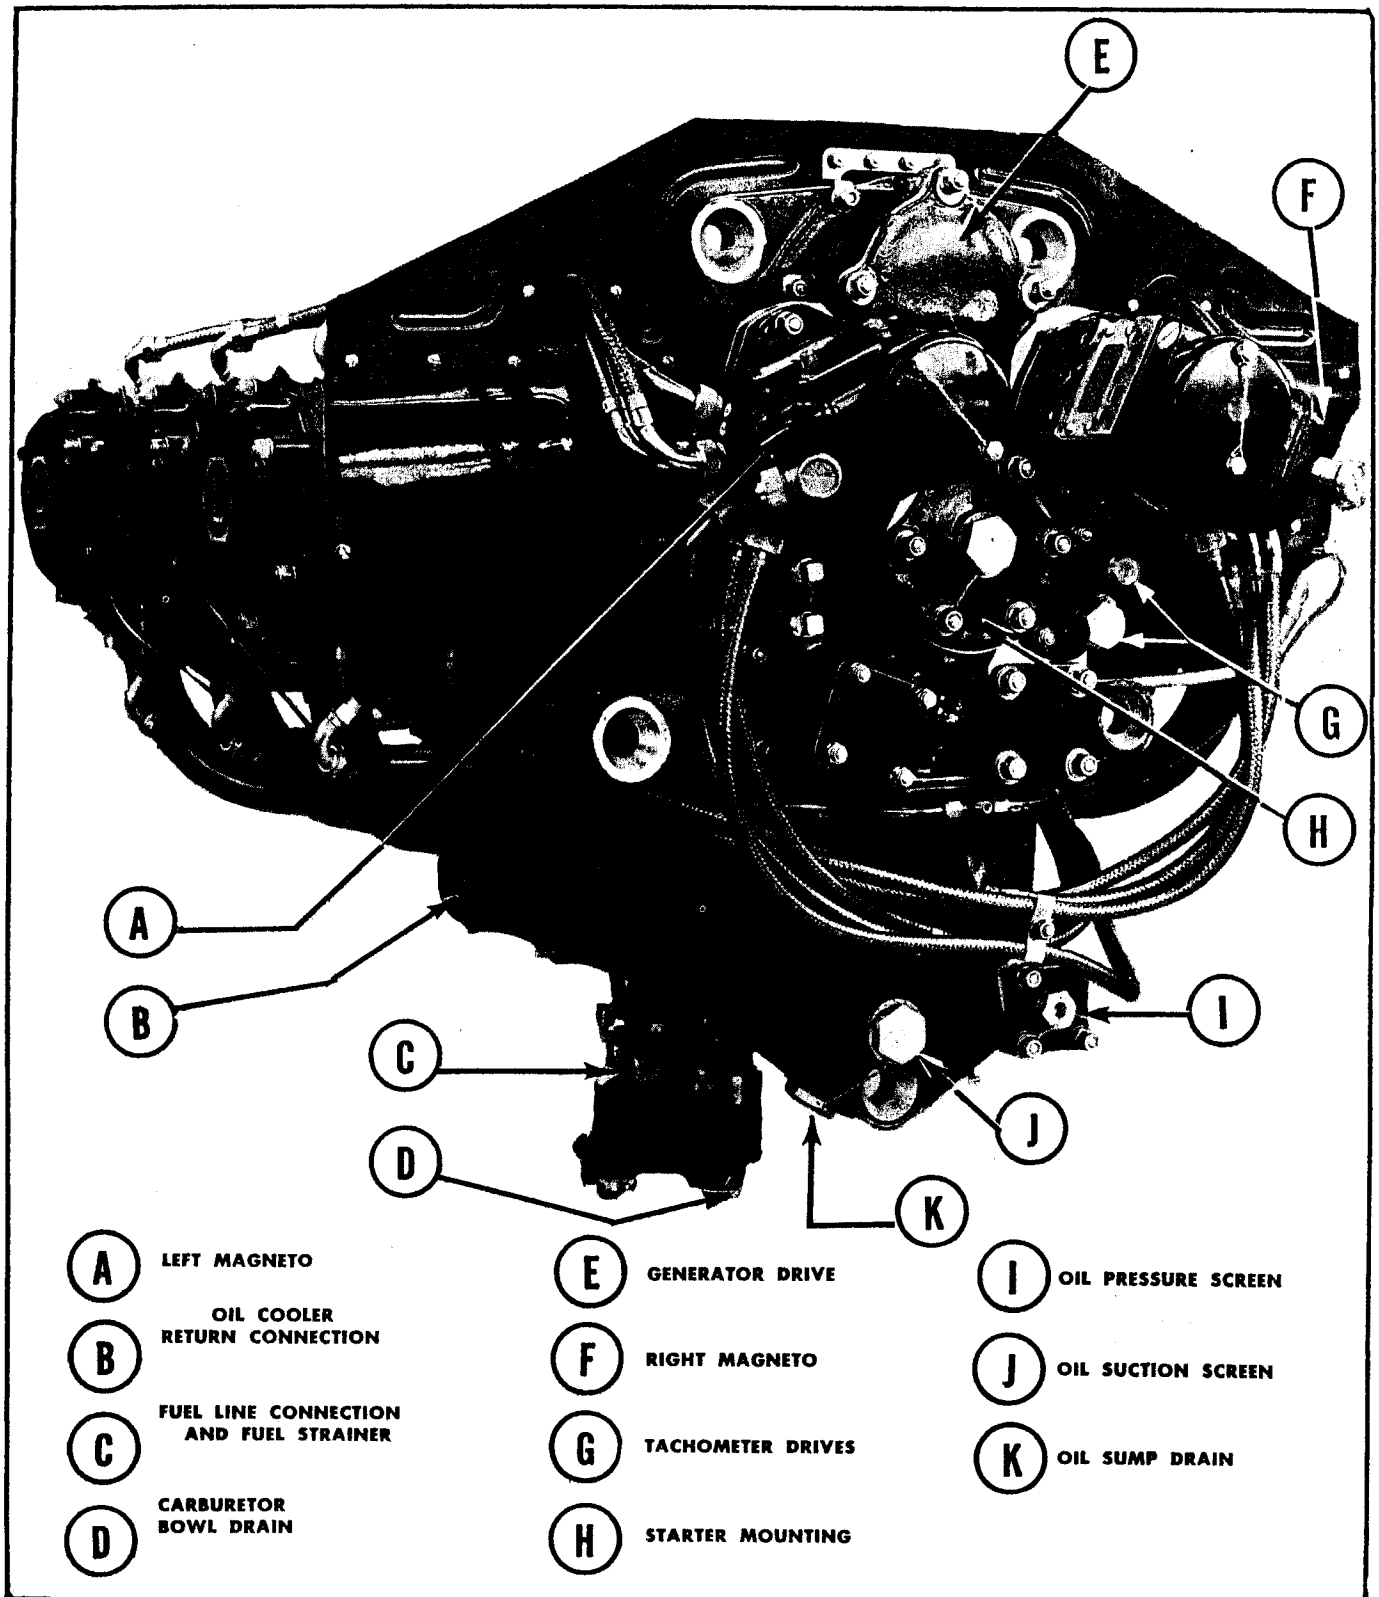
Three-quarter Rear View, Model O-435-1 Engine
